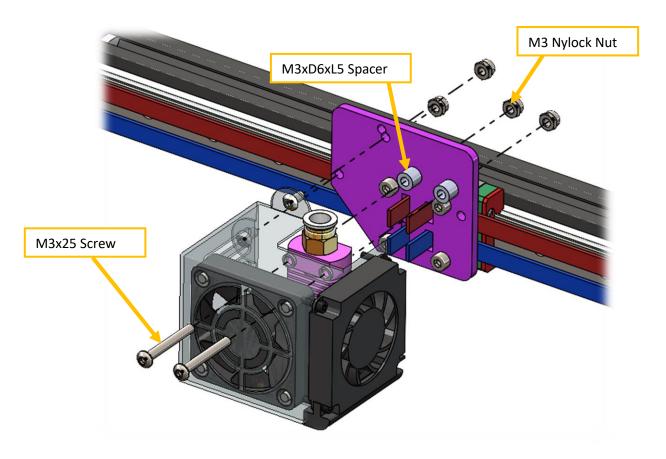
Stock Hotend Cr-10/PRO mounting scheme.
